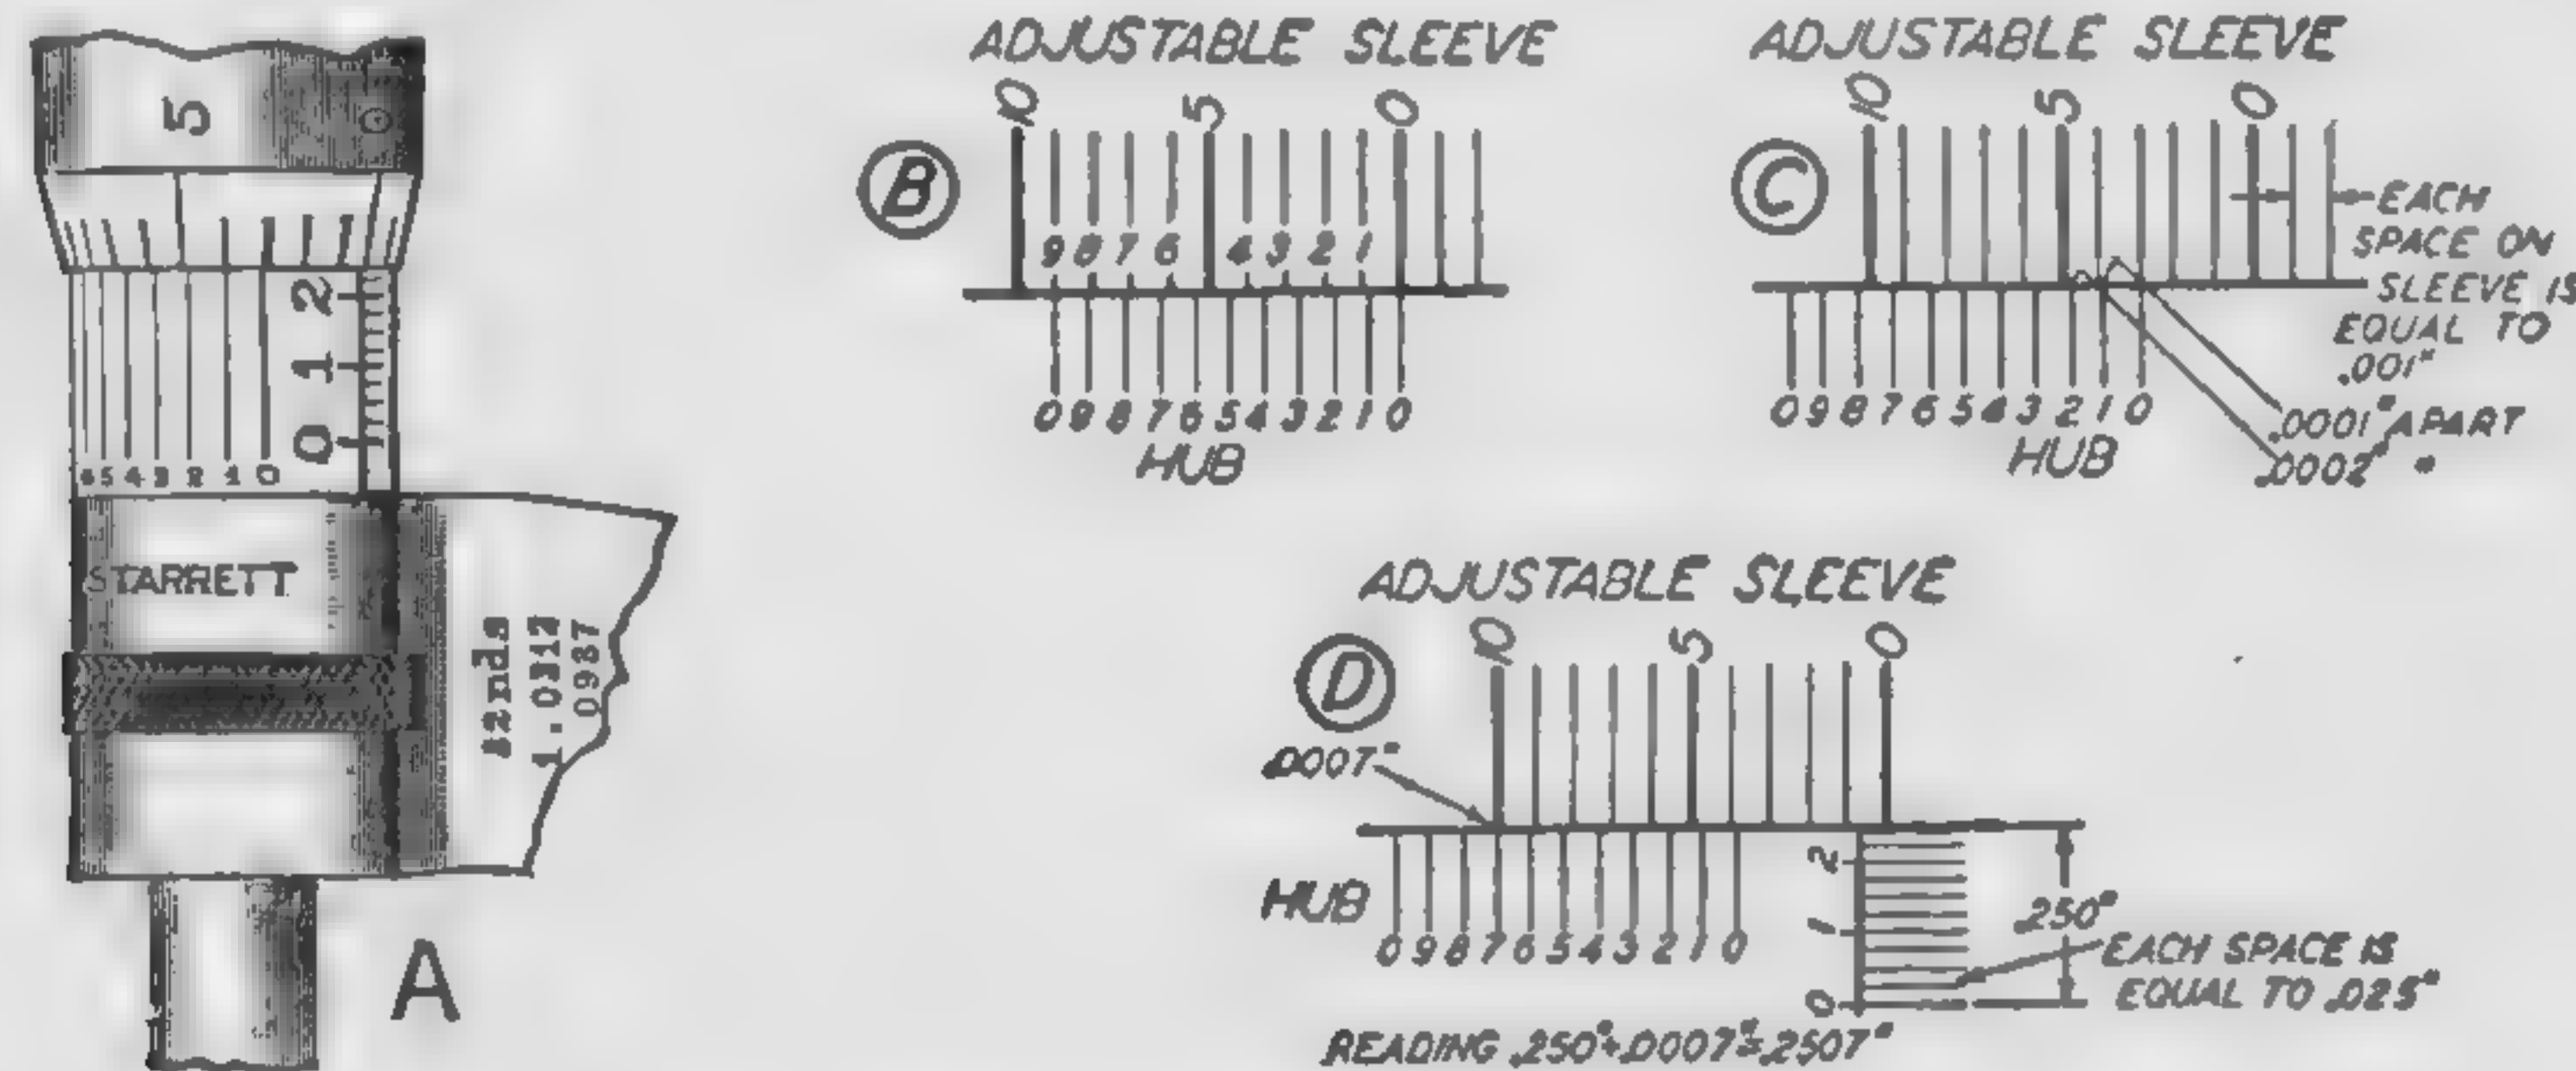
How to Read the Micrometer Caliper with a Vernier
